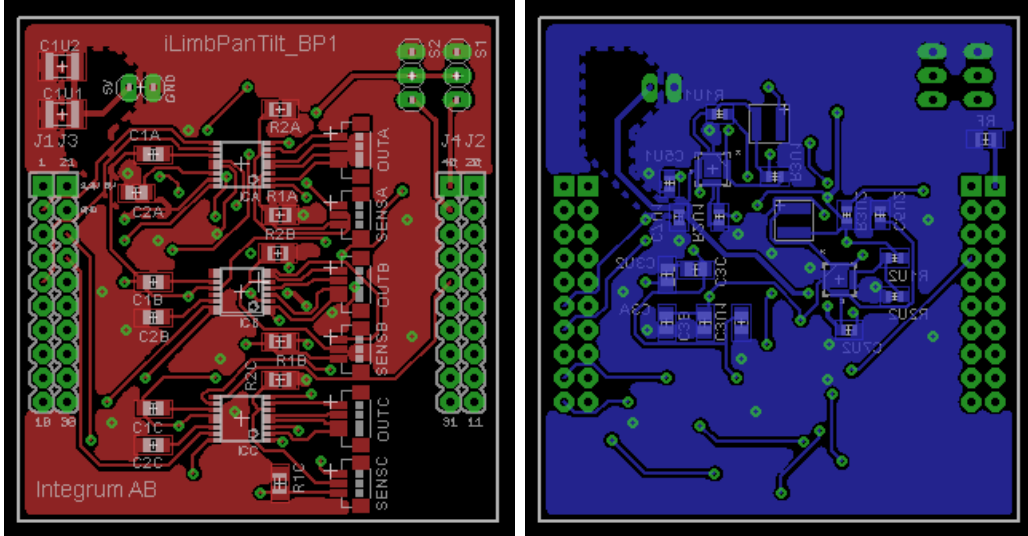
These figures shows the layout of the PCB design. The red layout is the top layer and the blue layout is the bottom layer.
